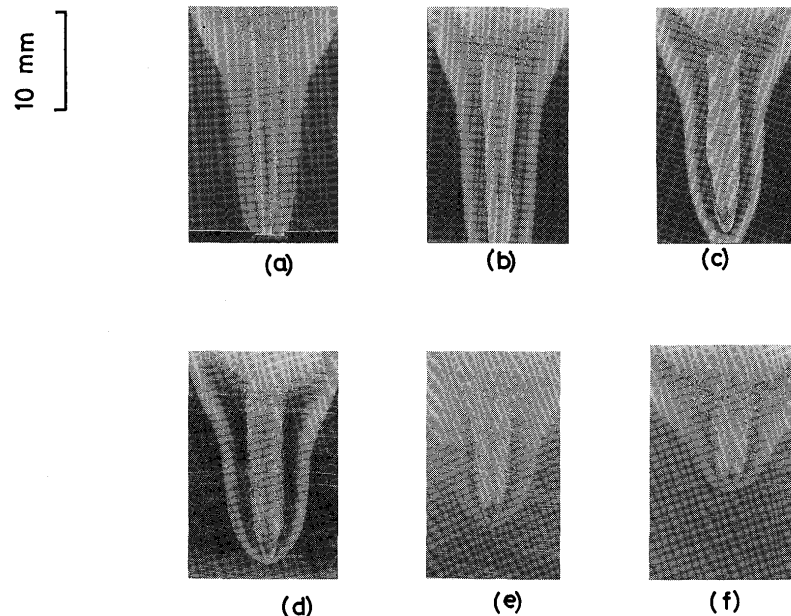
Macro-photographs for cross-sectional HT80 welds of 30KJ/cm weld heat input in various α_b parameters.
